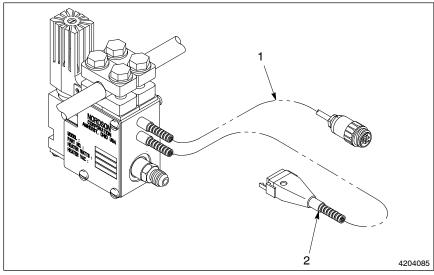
Connecting the Coil Cordset to the Gun Driver
